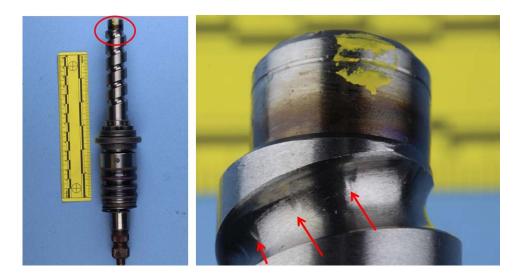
The helical worm gear of the 2007 Dodge Ram 3500 pickup truck with a close-up view of the recirculating ball bearing indentations (shown by red arrows)
